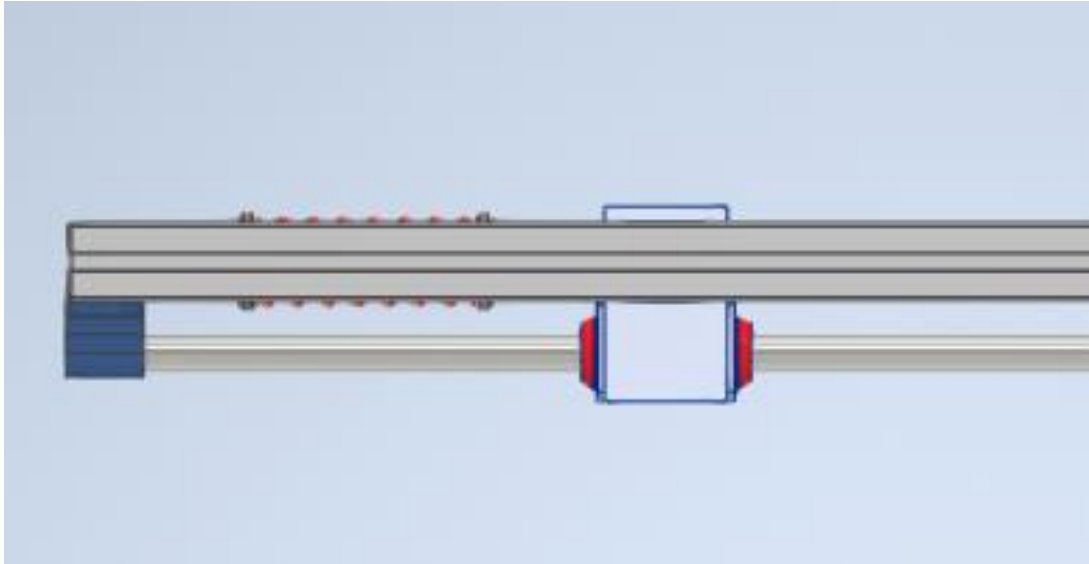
Side View 3D Assembly For Suspension System 2099 A
